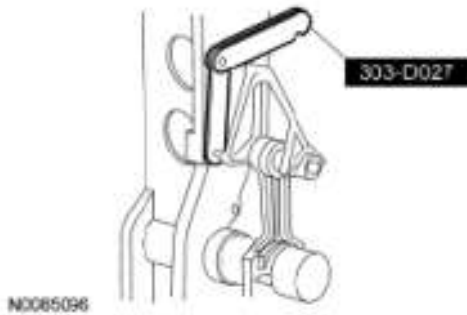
Measuring Connecting Rod Twist On Suitable Alignment Fixture
